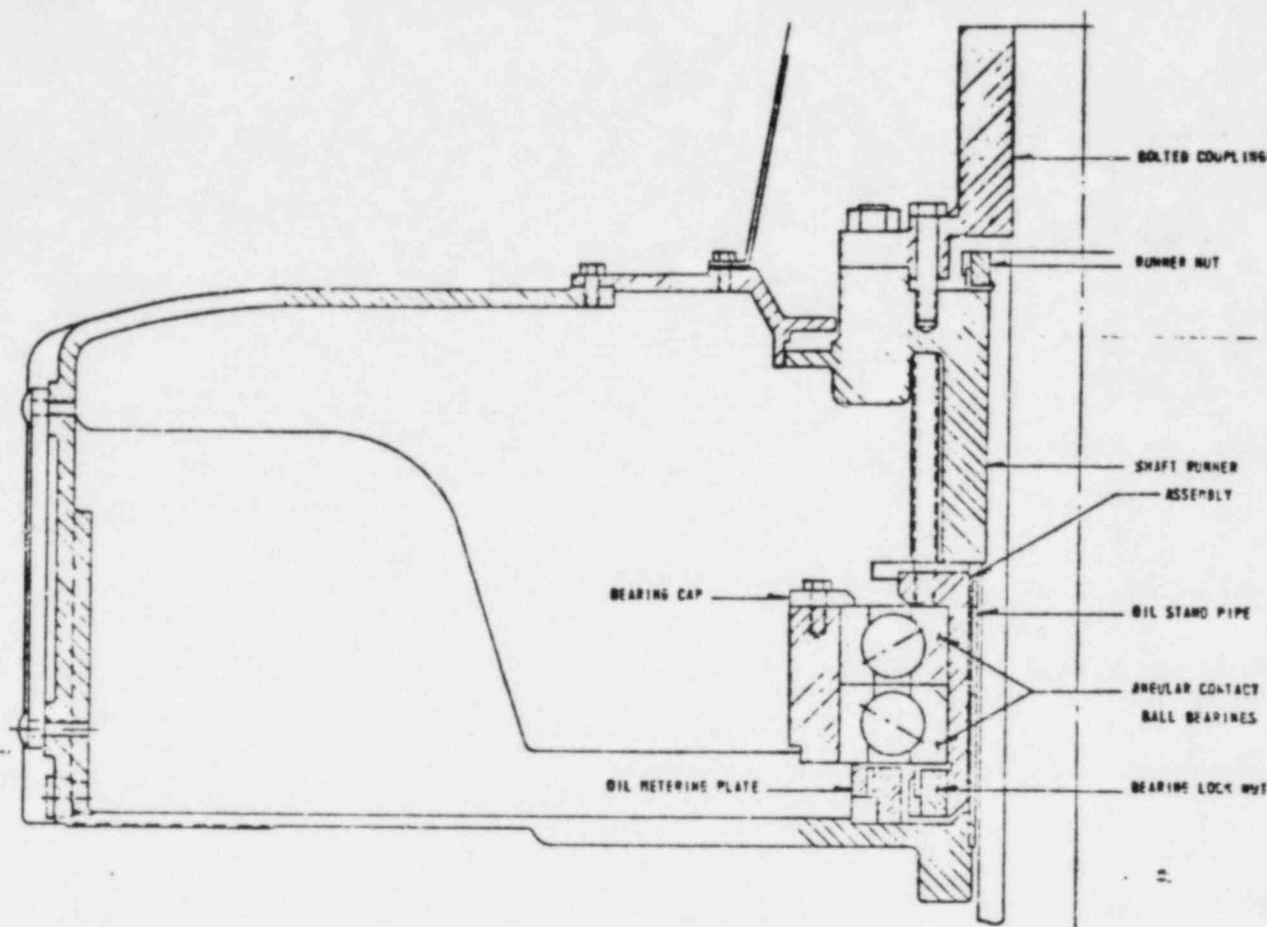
High thrust hollow shaft with angular contact ball bearings.
